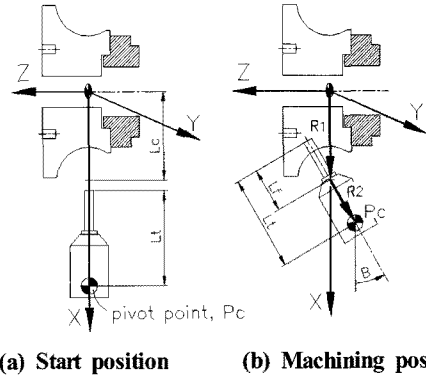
Machining mechanism of AB type 5-axis turning M/C
